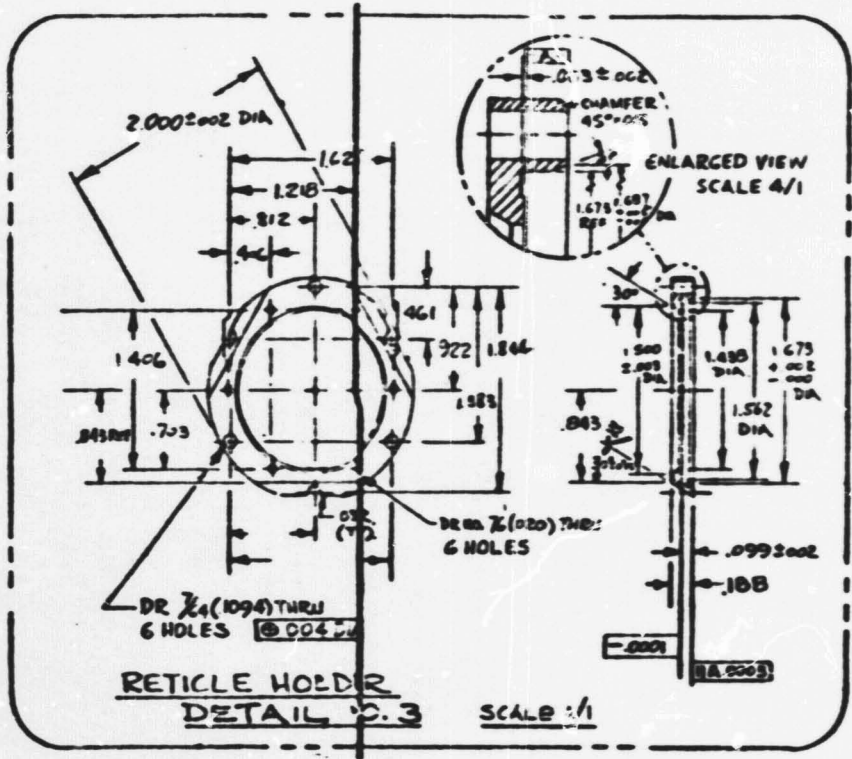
Adjustable Reticle Assembly - SCT (Sheet 2 of 3)
